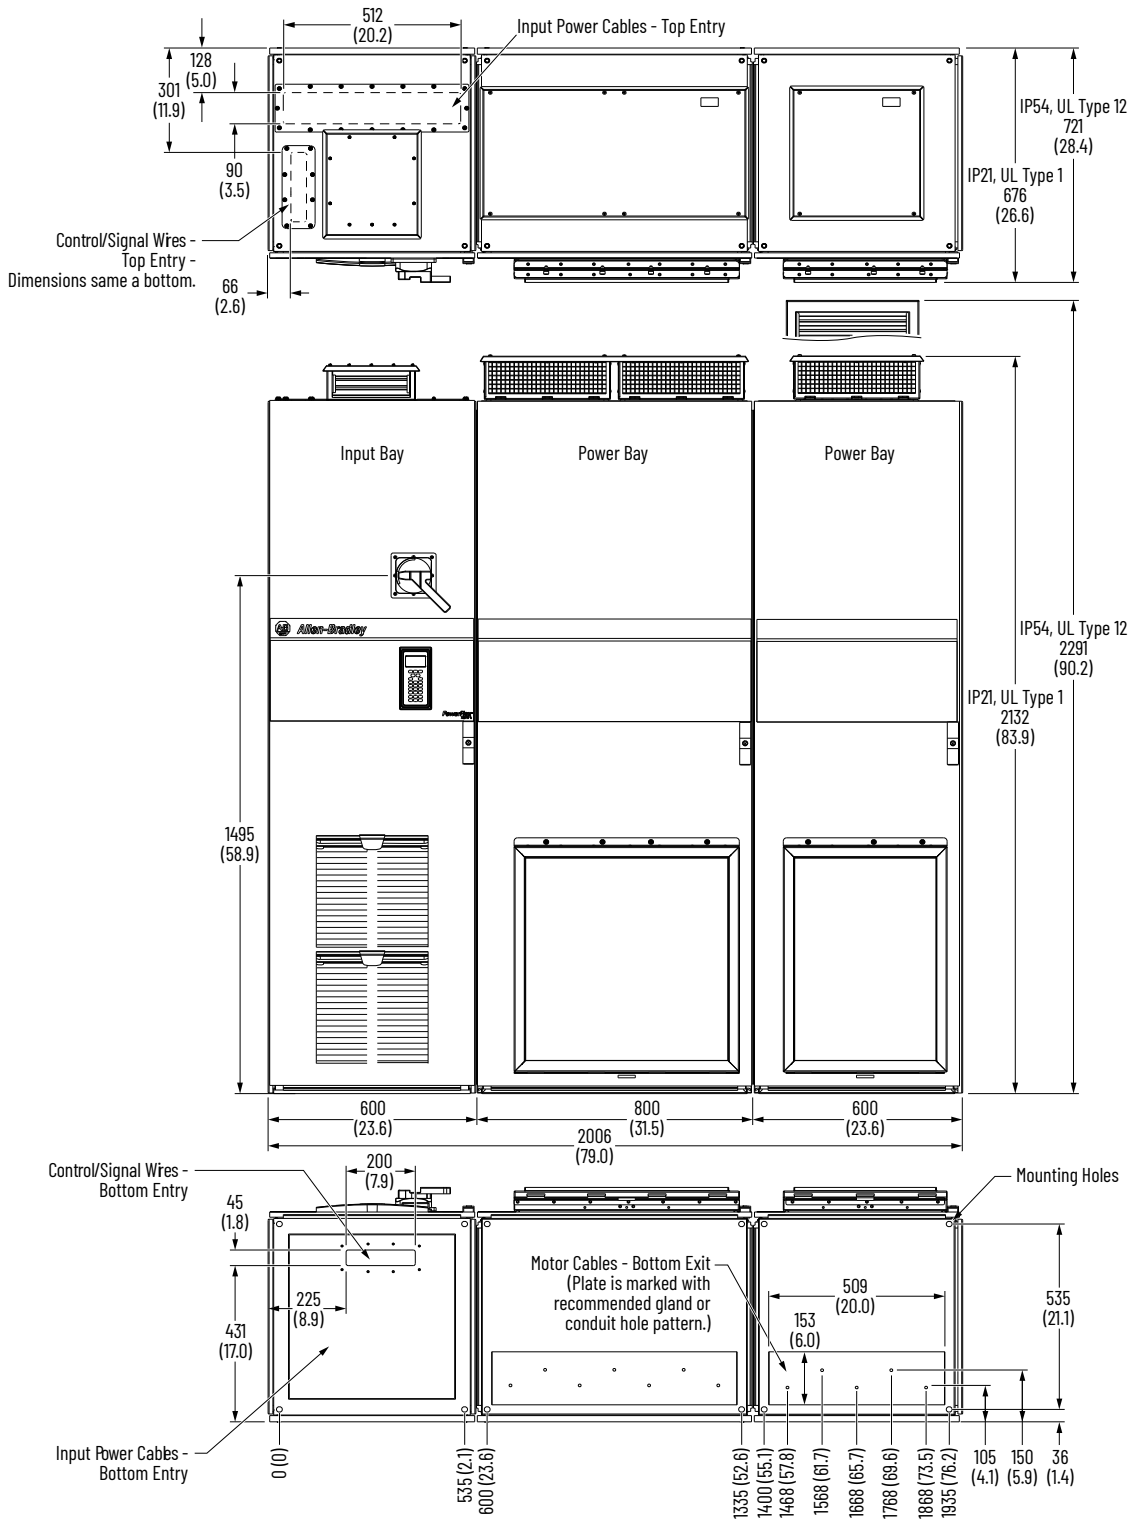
Frame 8 Drives—Top, Front, and Bottom Views—Dimensions are in mm (in.)
